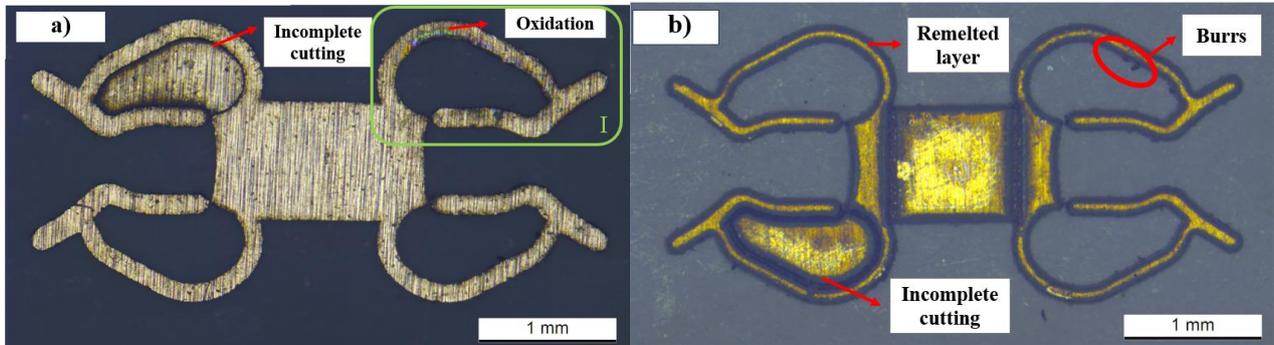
a) Bottom and b) top of the clamp obtained via optical microscope.
